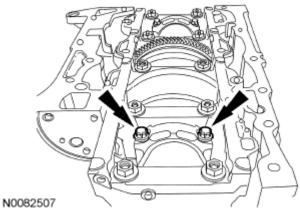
Locating Connecting Rod Cap Bolts Courtesy of FORD MOTOR CO.
